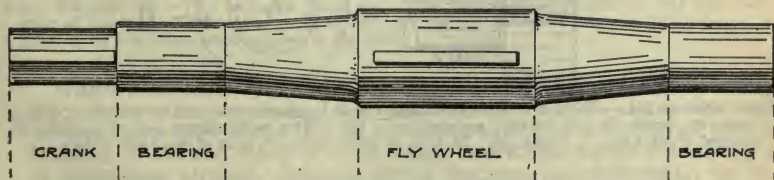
Approved form for a long shaft carrying a heavy fly wheel. The enlarged central portion gives stiffness to prevent springing.
